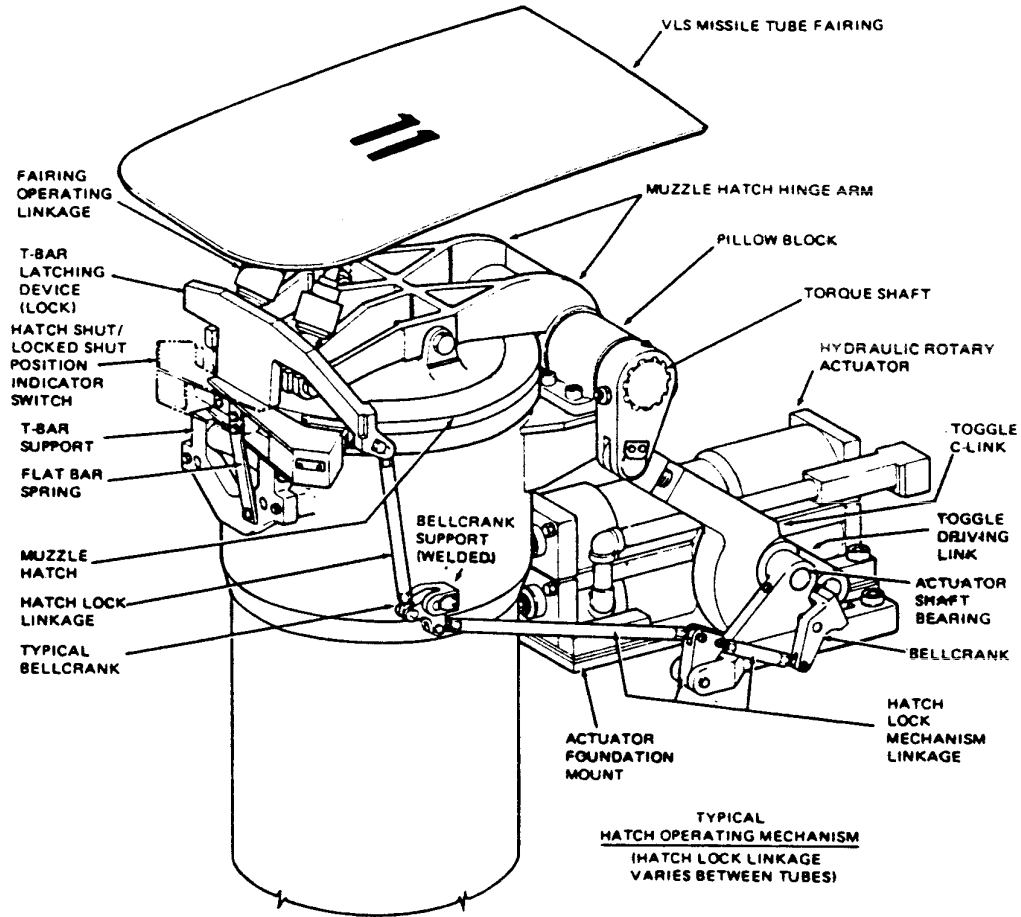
Missile Tube Muzzle Hatch Operating and Locking Mechanism (SSN 719 and 720)(Typical)
